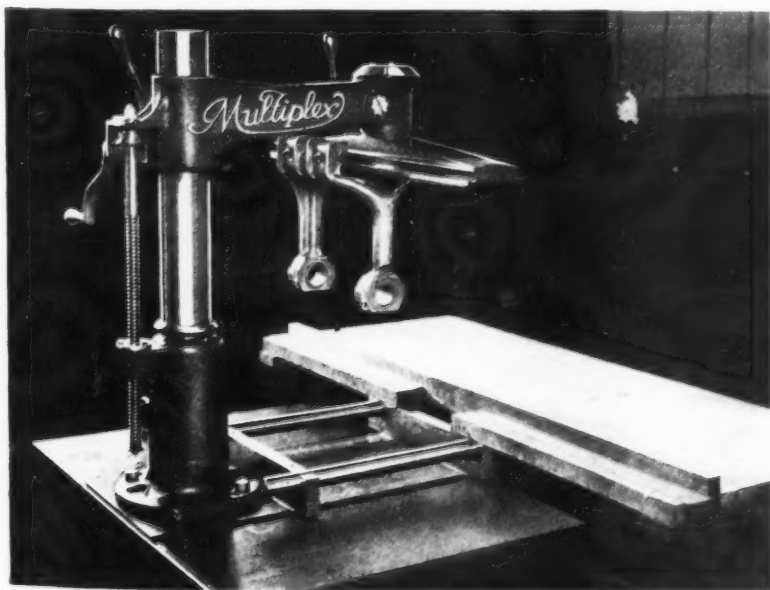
Saw Shown in Fig. 5 Provided with the New Welded Type Steel Carriage
